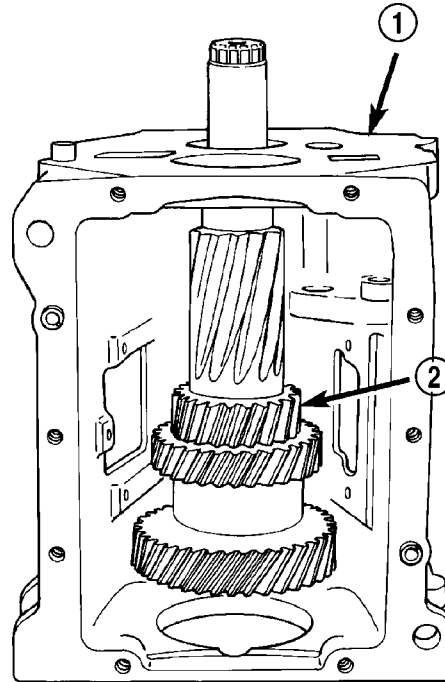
COUNTERSHAFT FRONT BEARING
